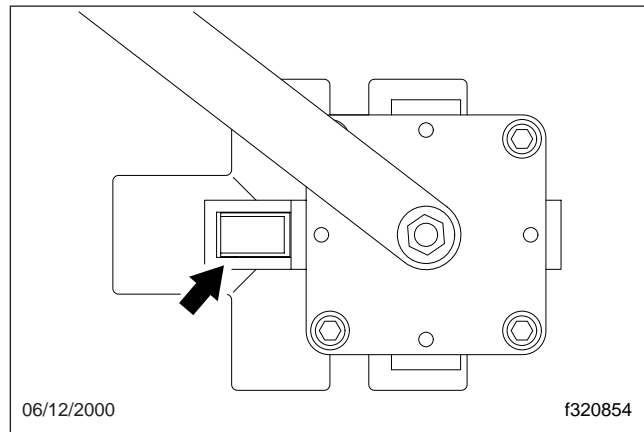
, Exhaust Flap Location (height-control valve with integral dump port)
